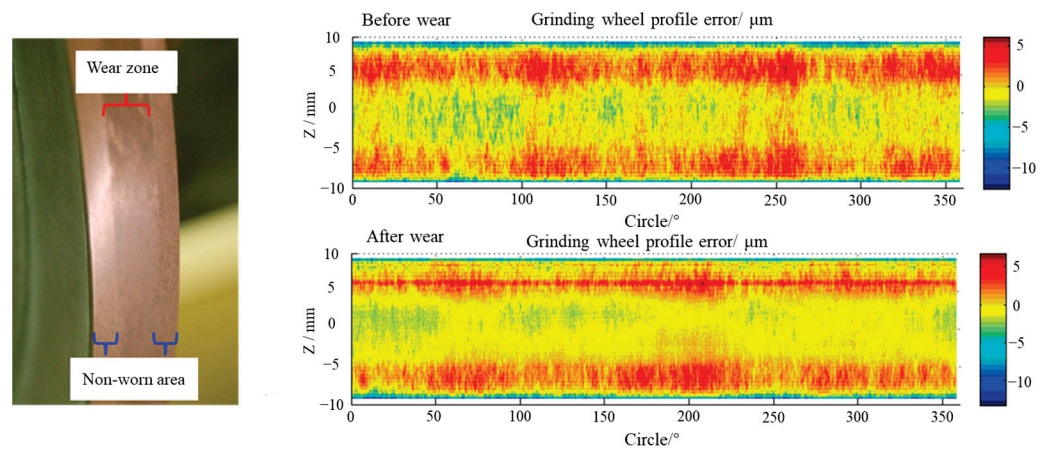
Macroscopic wear morphology of a silicon carbide grinding wheel.
